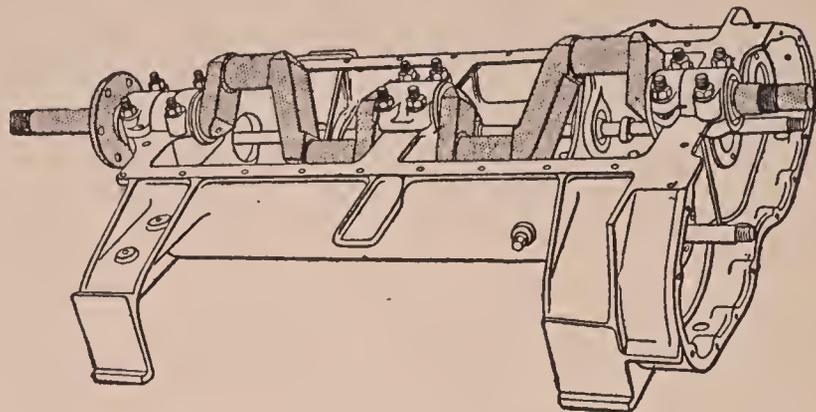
The motor crankcase after the flywheel is off, but before the main bearings have been disturbed.
